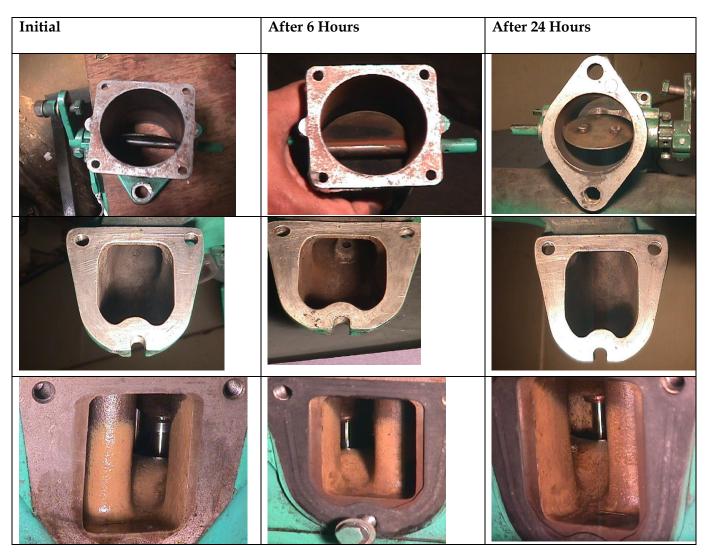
Butterfly Valve, Intake Manifold and Cylinder head
